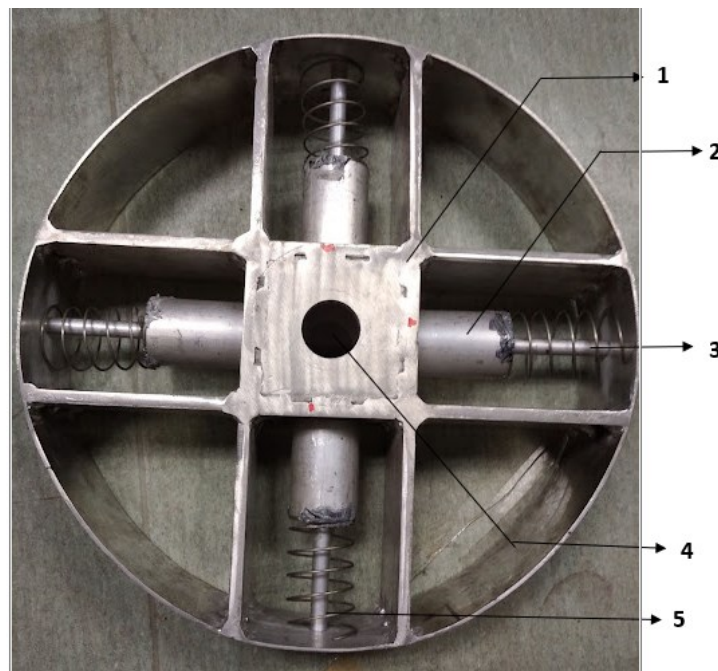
Prototype of the flywheel (1) Rim of the block, (2) Mass block, (3) Spring, (4) Shaft hole and (5) Mass holding rod
